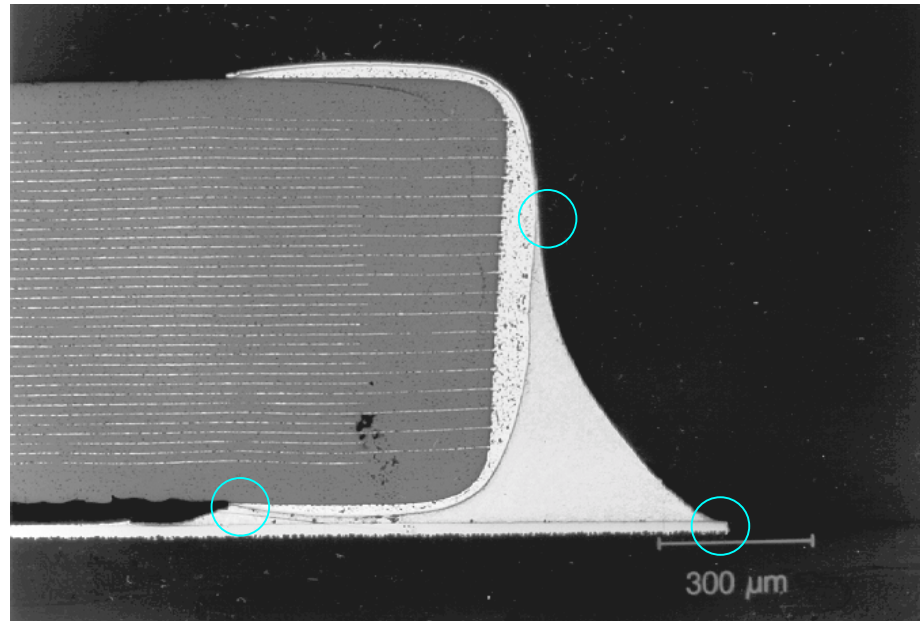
The kinetically constrained regions in the solder joint between a surface mount component lead and a solder land on a printed wiring board [59].
